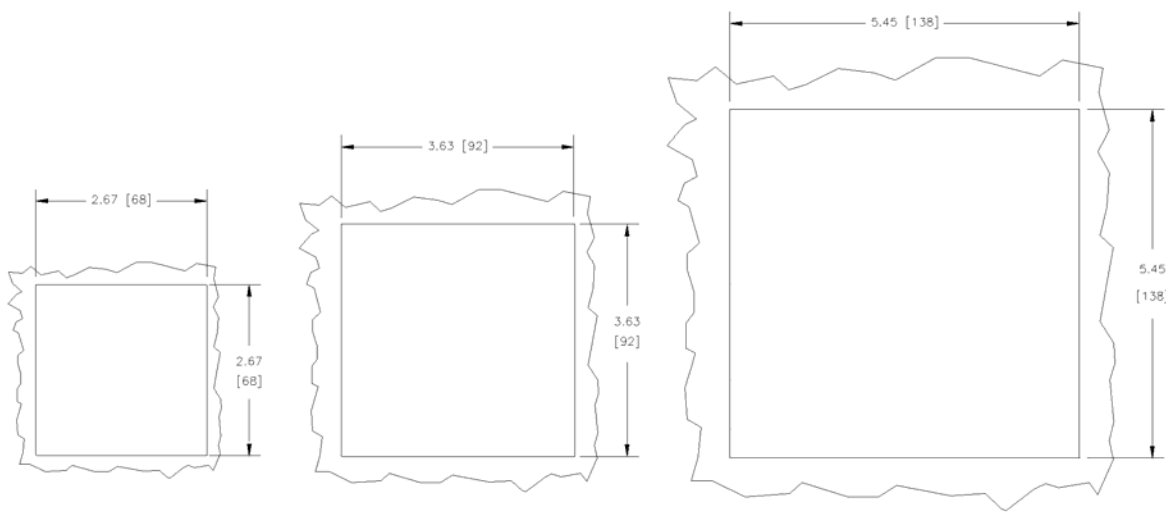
Indicator Cut-Outs (280, 380, 580)
